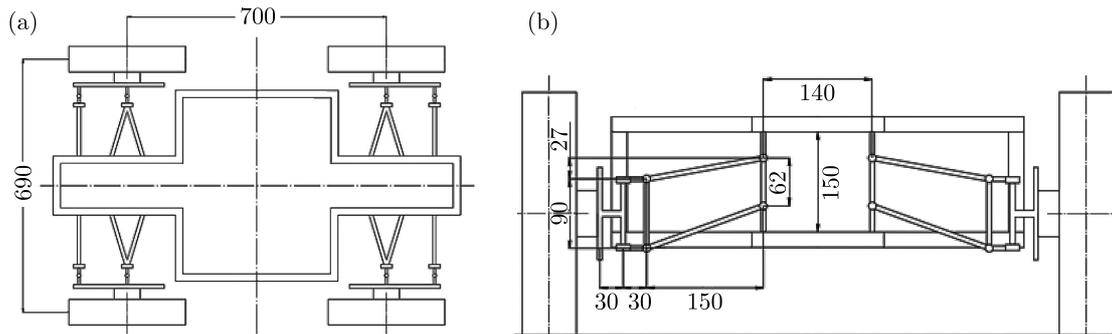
Designed dimensions (in mm) indicated in: (a) an overall scheme of the mobile platform, (b) a scheme with details of the suspension system
